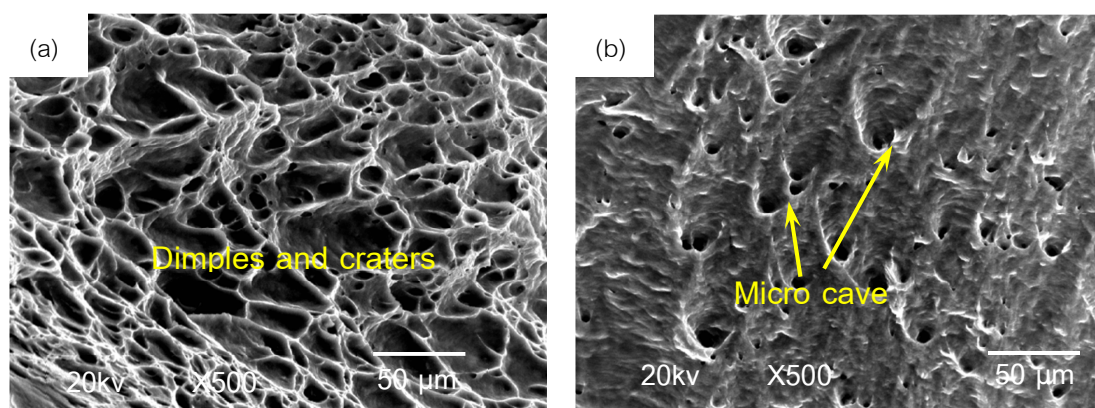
The investigation fracture of friction stir spot welding (a) speeds 1,500 rev/min, feeds 80 mm/rev and 1.5 mm, (b) speeds 1,000 rev/min, feeds 80 mm/rev and 1.2 mm.
